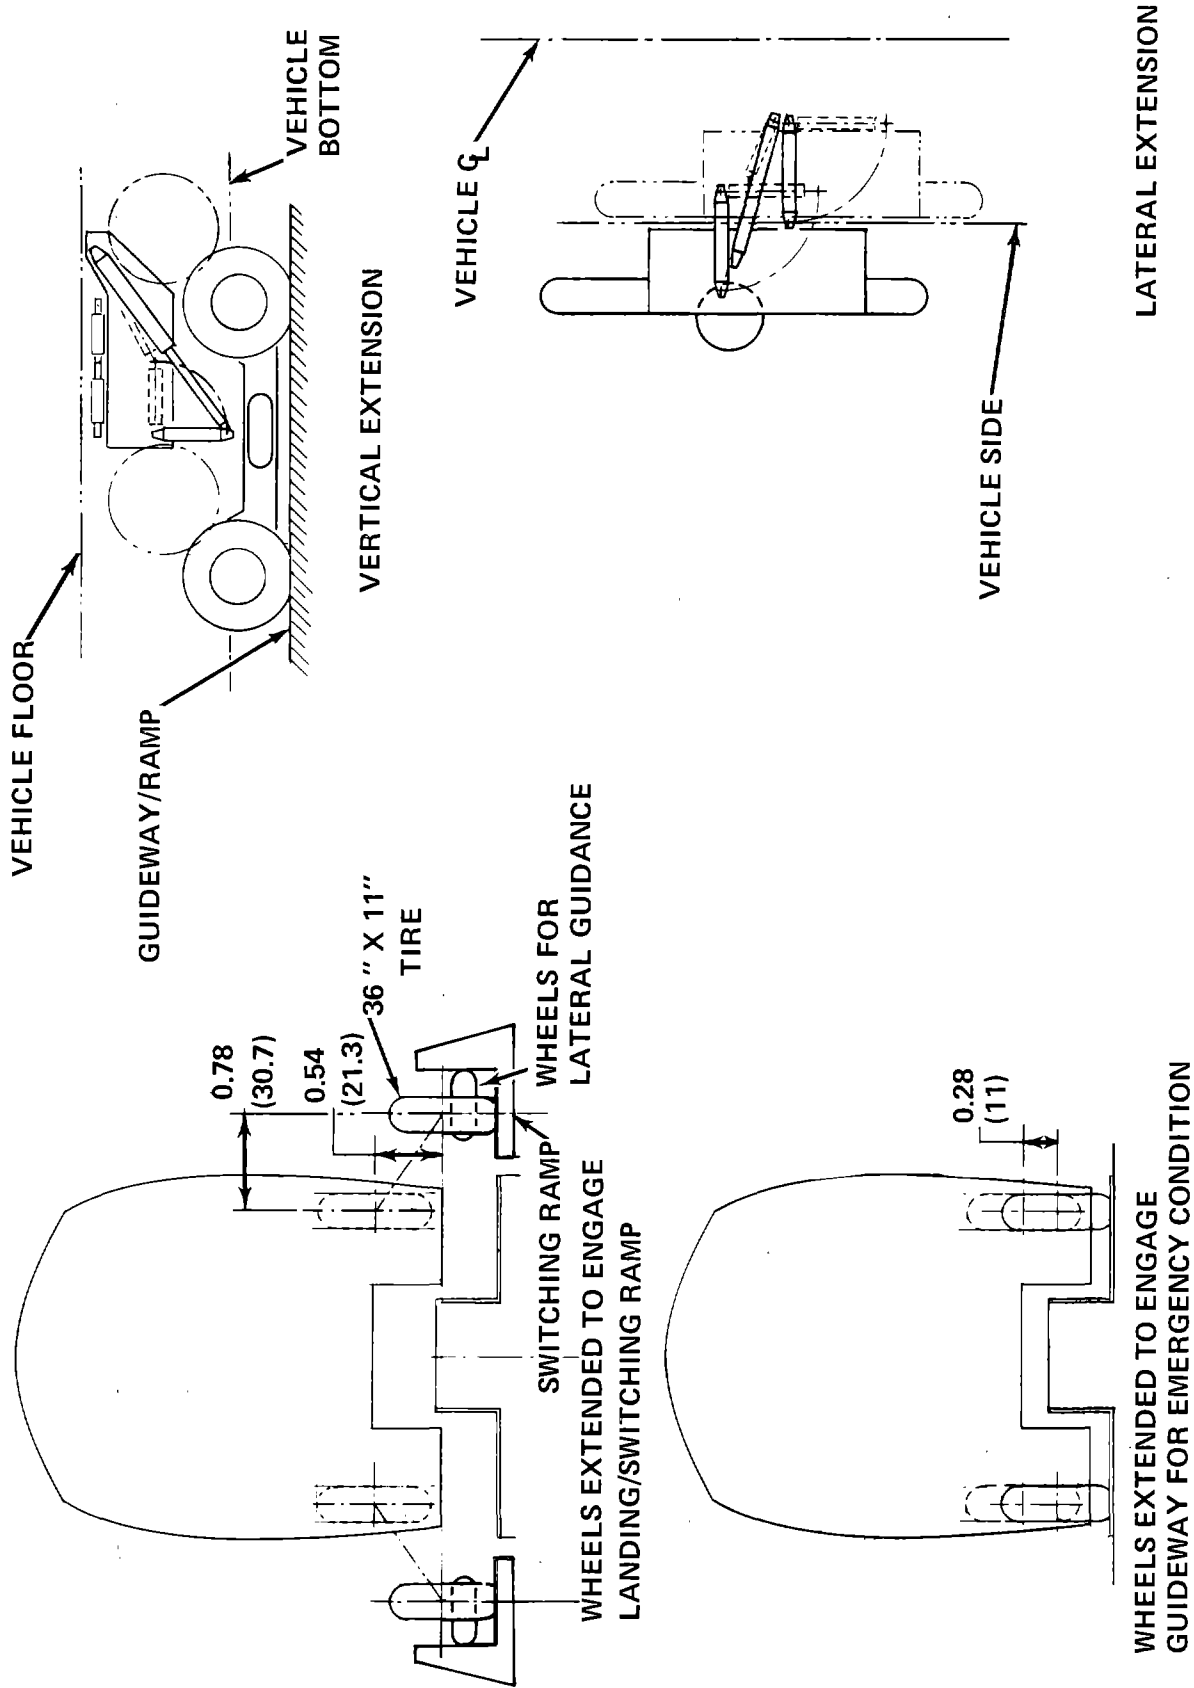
LANDING / SWITCHING GEAR ARRANGEMENT
